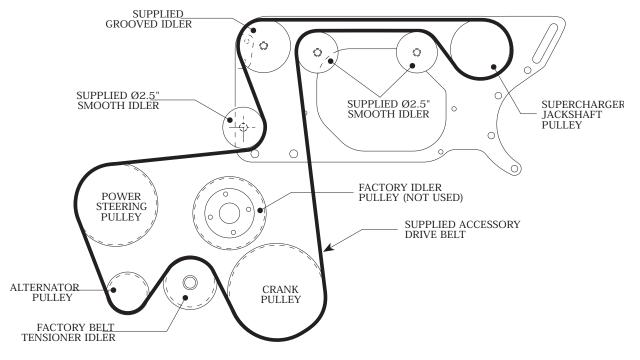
e / Accessory Drive Belt Routing (300hp Engines)
